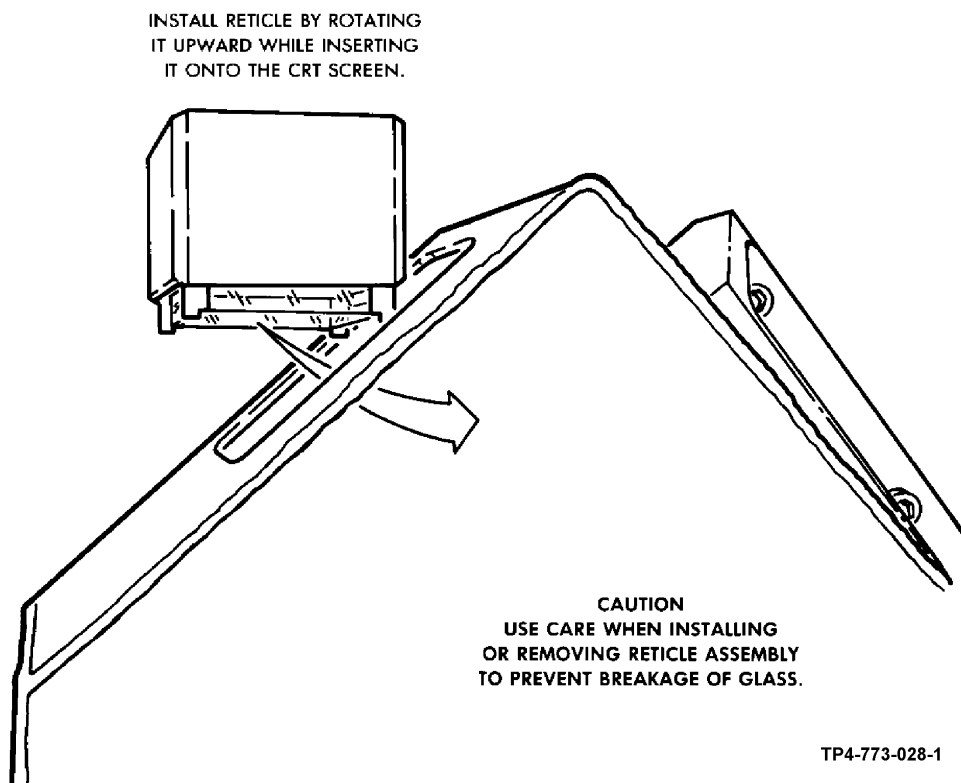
Proper Installation of Reticle Assembly onto CRT Screen
